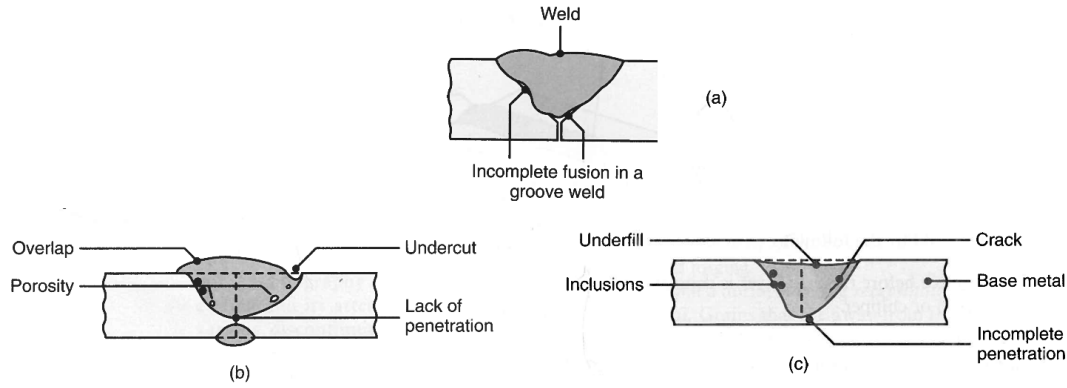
Figure a-c [9] displays different types of common welding defects.
